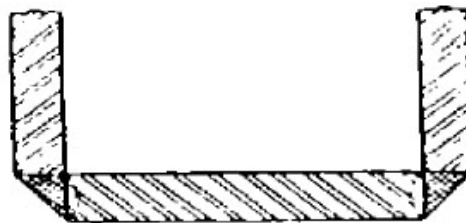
EXAMPLE OF CORNER WELD SUBJECT TO BENDING STRESS
